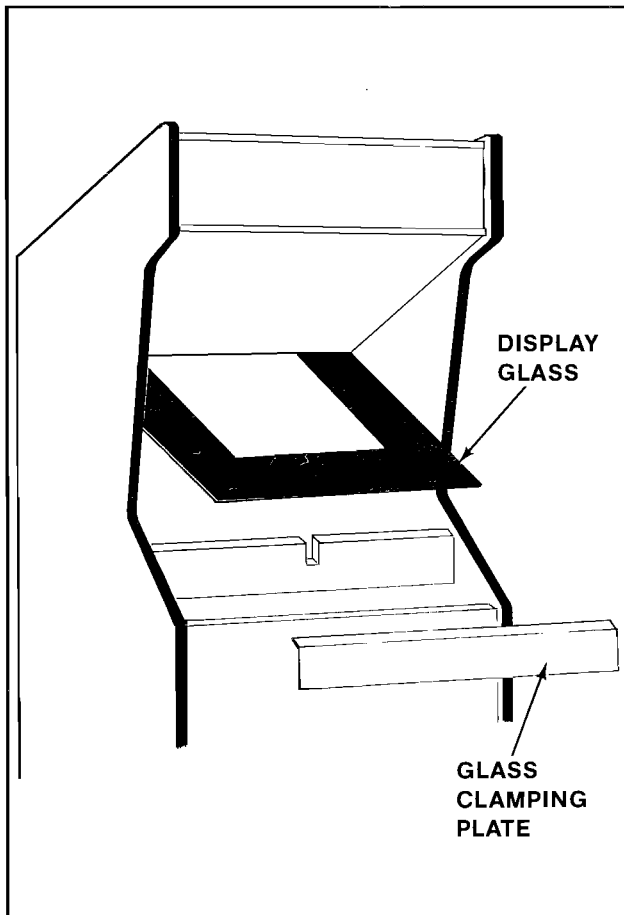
Removing the Main Display Glass & T.V. Bezel — Upright
